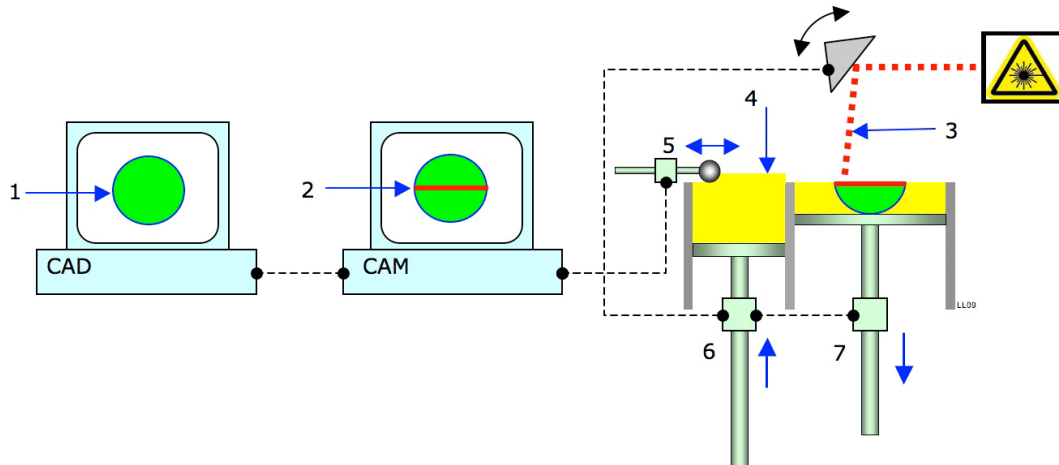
Selective laser sintering/melting process showing (1) CAD model, (2) CAM tool path, (3) laser, (4) powder feed, (5) powder feed/levelling roller, (6) powder delivery piston, and (7) fabrication piston (courtesy Wikipedia).
